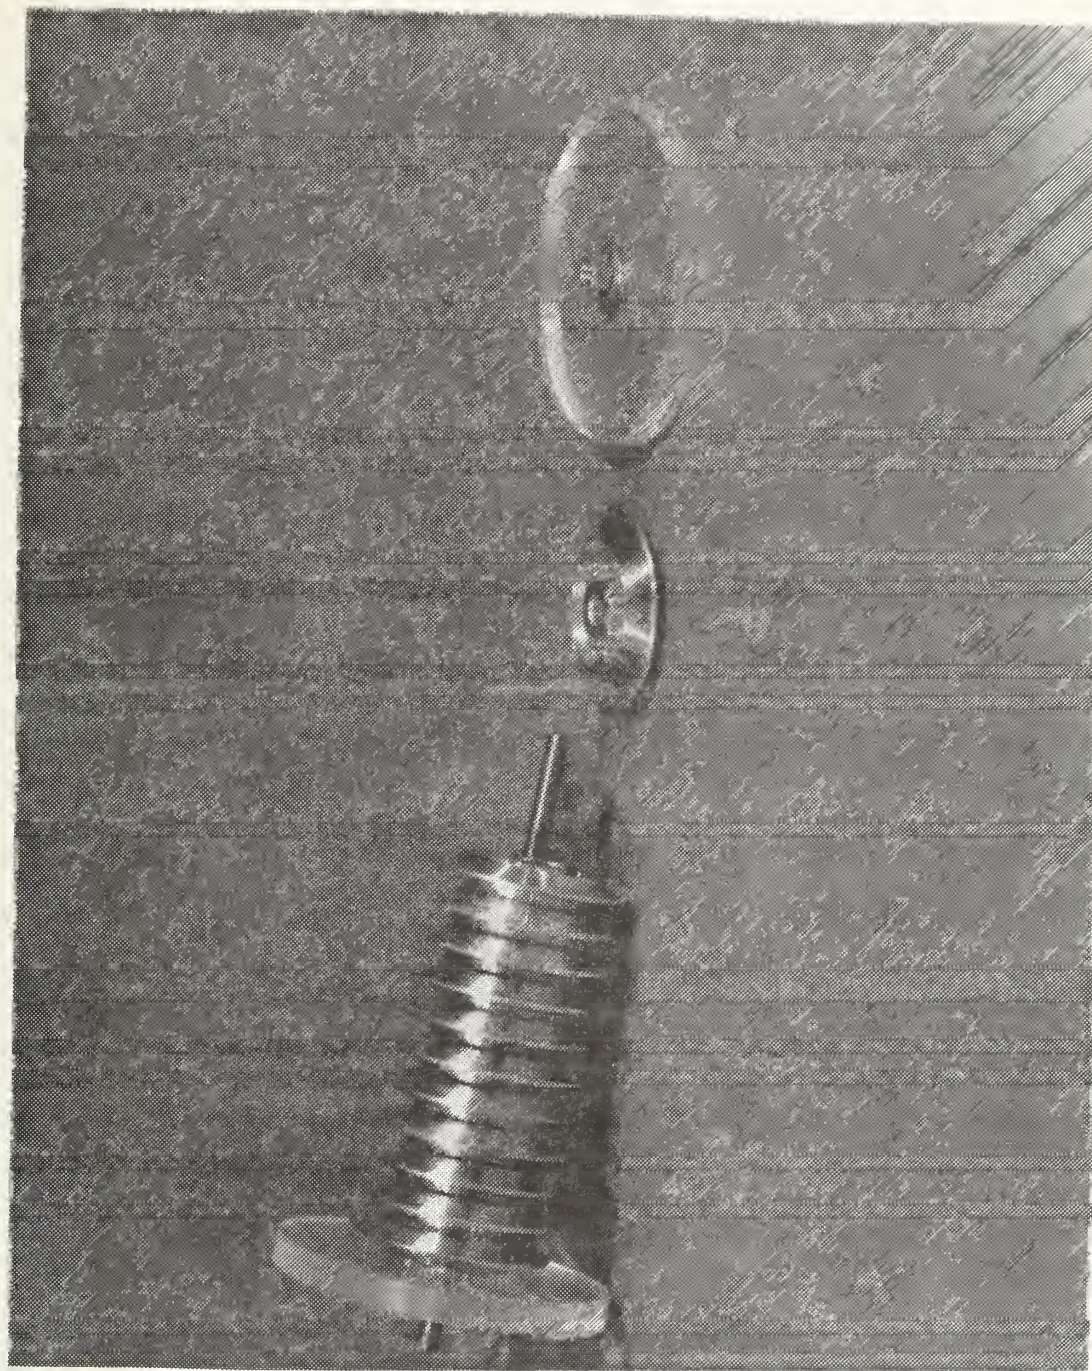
DISASSEMBLED NOZZLE STACK (COURTESY NWC, CHINA LAKE)
